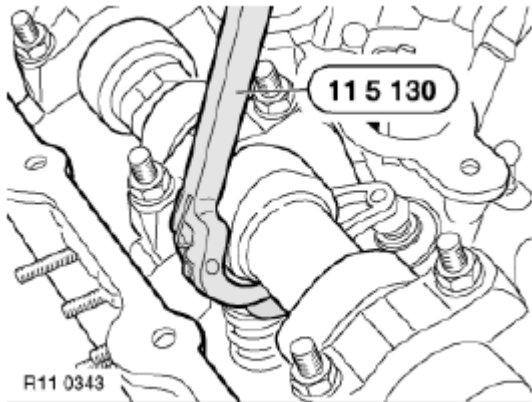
Rotating Engine On Central Screw Engine-Wise Until Cams On Camshaft Point Vertically Upwards
